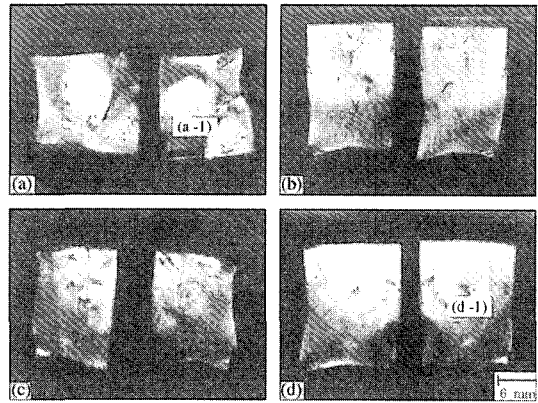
Fracture surface of specimens with internal cracks after fatigue testing at 35 kgf/mm² stress range (each specimen was overloaded by 35 kgf/mm² stress range in order to fracture the specimen artificially)
